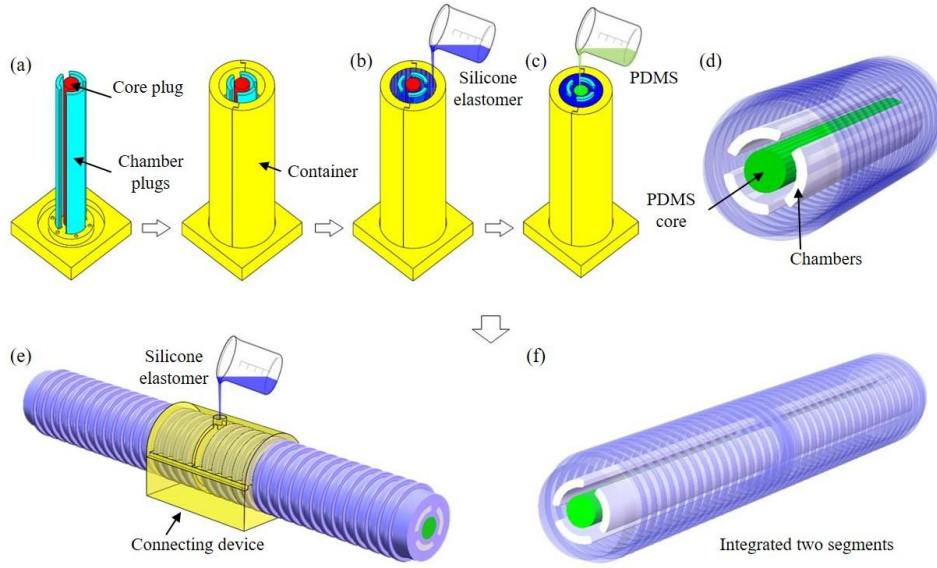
Fabrication of a soft robotic arm. (a) 3D printed mold for a single segment soft arm, where the chamber plugs and core plug are used to form the core and chambers; (b) fill the mold with Dragonskin 10; (c) remove the center template and cast with PDMS; (d) single segment removed from the mold; (e) integrate two segments with connecting device filled with Dragonskin 10; (f) the integrated double segments of soft robotic arm.
